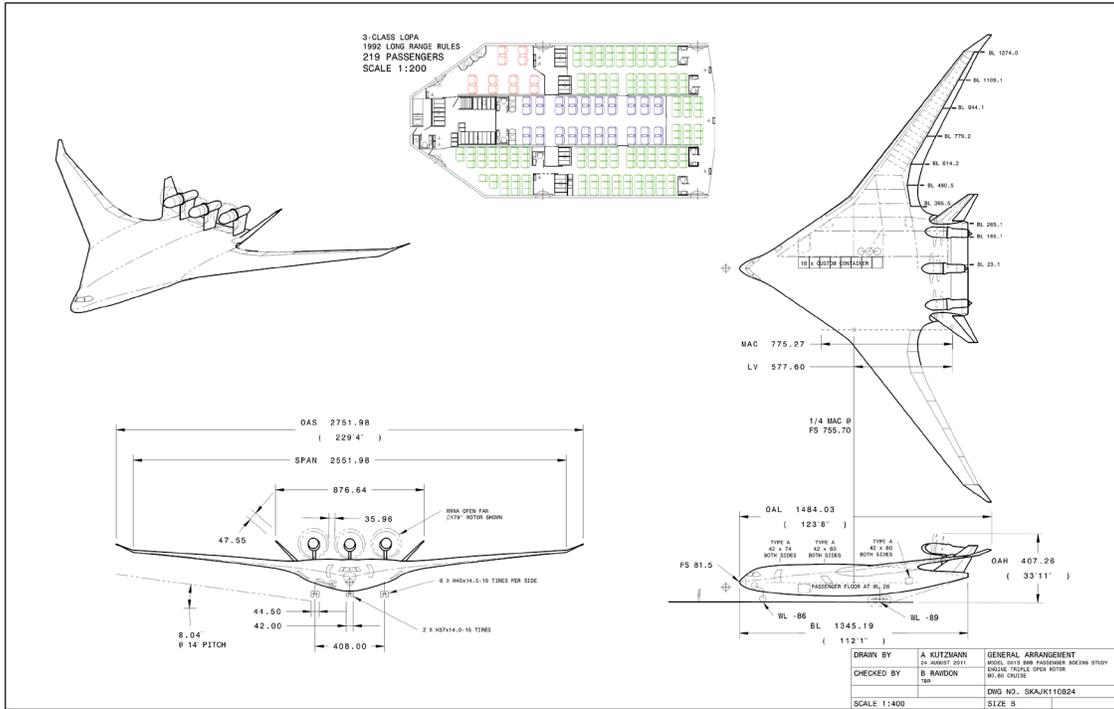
General Arrangement Drawing – 2025 BWB-0015 Passenger
